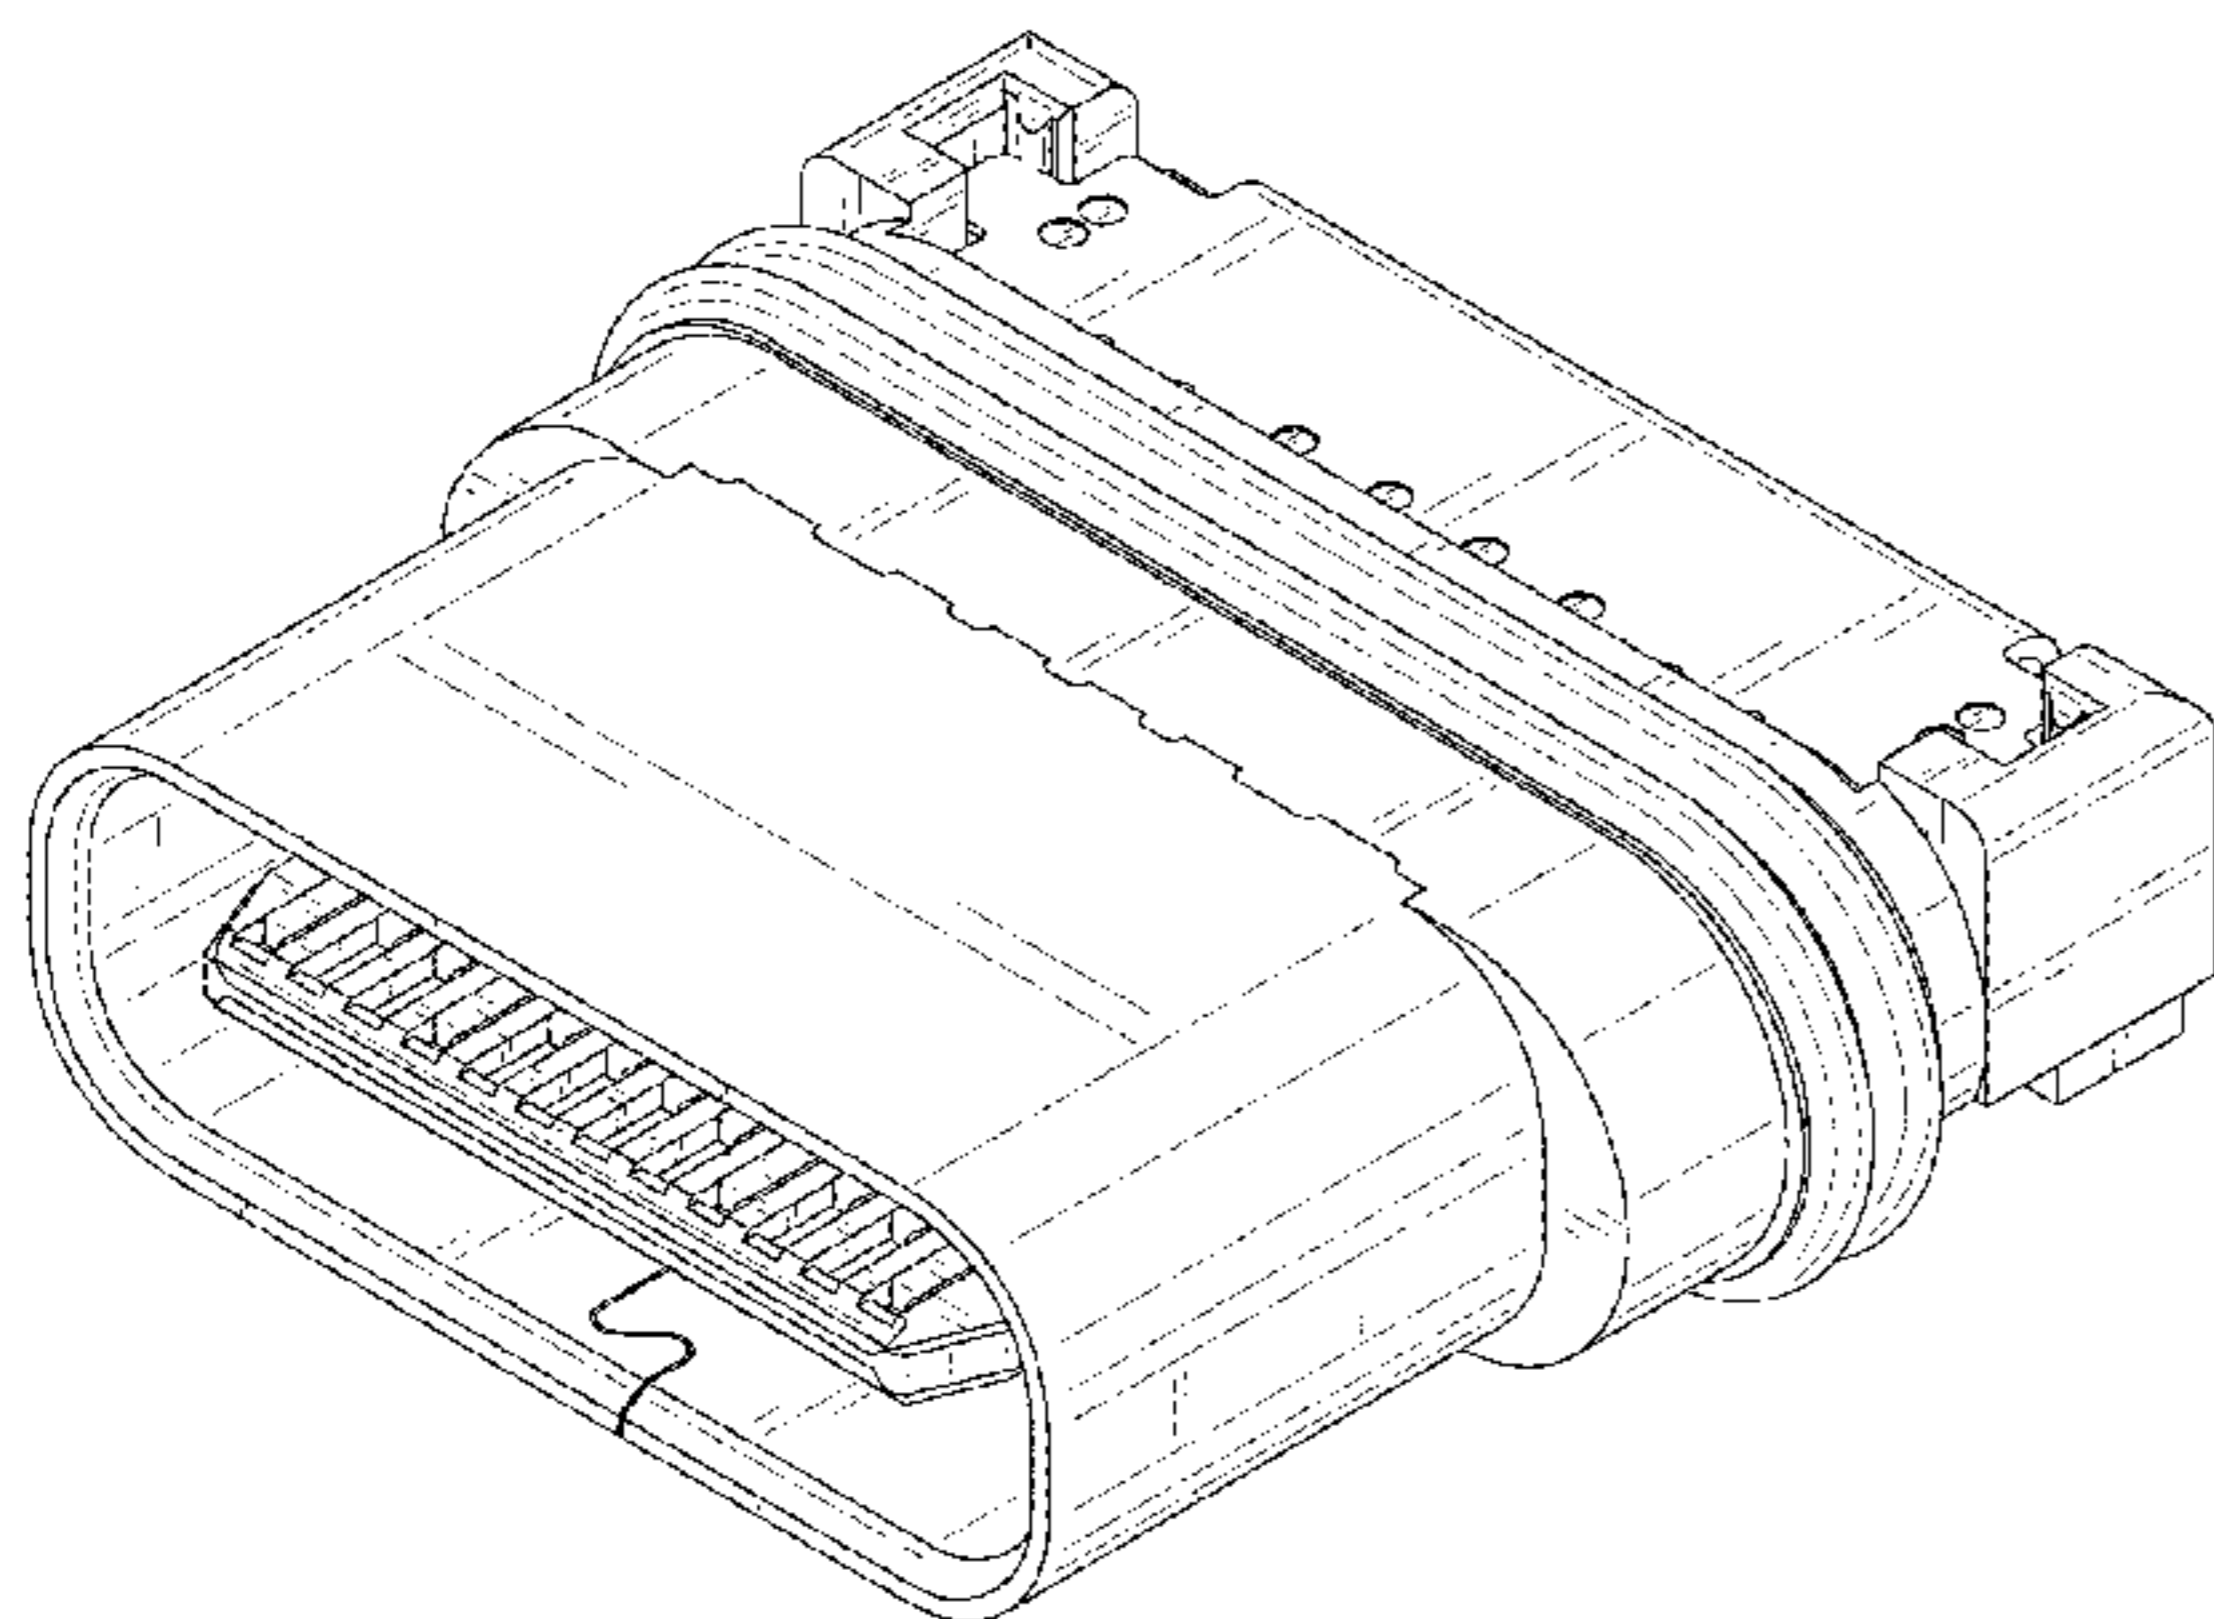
is a perspective view showing a rear, bottom and left side thereof;
